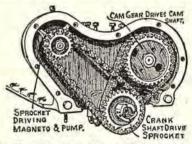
The silent-chain drive method on a six-cylinder engine. Note that the sprocket driving the magneto gear is slightly smaller; therefore the magneto gear will turn 1½ revolutions to the crank shaft gear's 1 revolution. (The magneto is usually driven by gears.)
